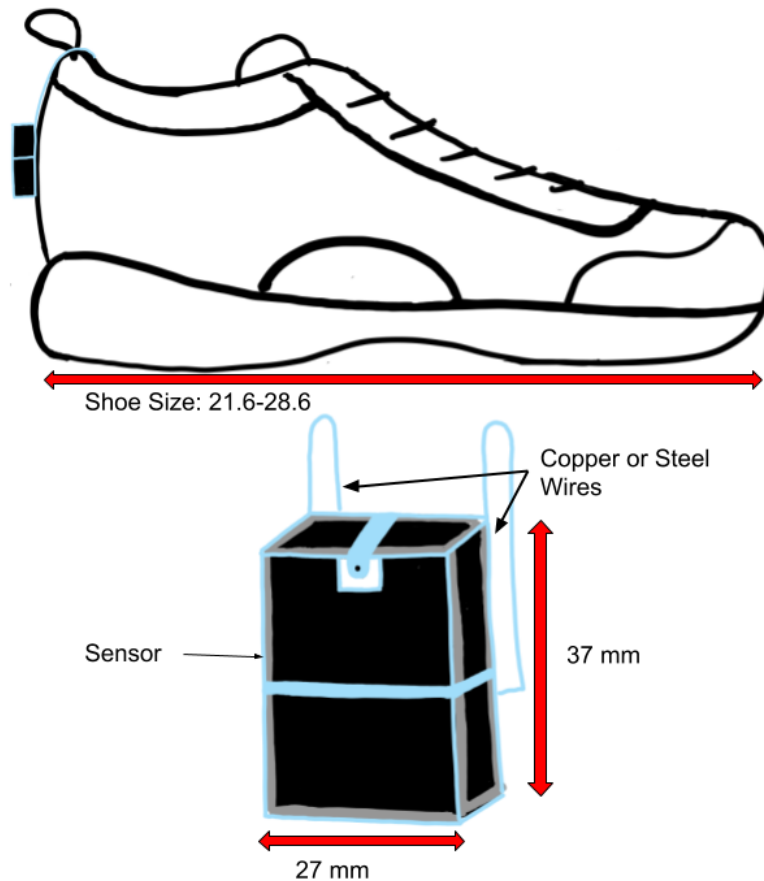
Shown here is “The Clip” design which uses wires that attach at the sensor holder and extend over the heel of the shoe and run down along the insides of the shoe.
